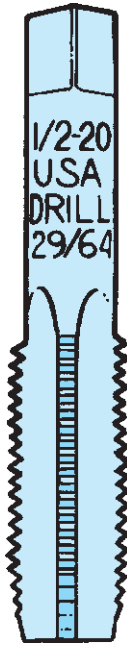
Many taps, especially larger ones, have the tap drill size printed on the top.
